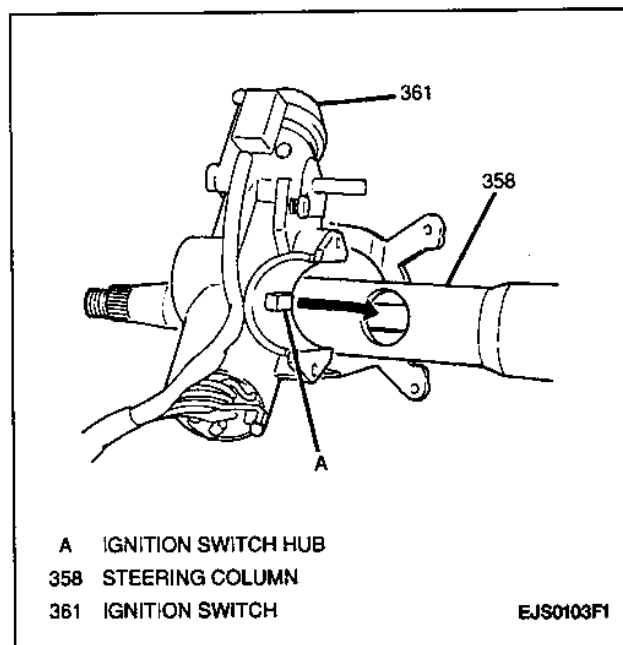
Aligning Ignition Switch Hub With Steering Shaft Hole
